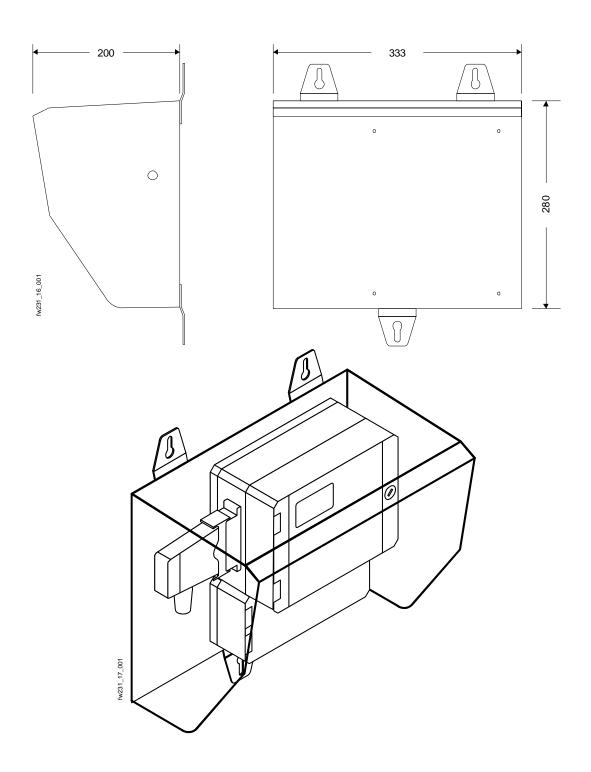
Dimensional Drawing: Weather protection roof for control unit
